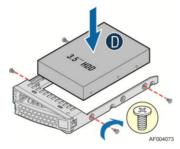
Installing Hard Disk Drive – Installing 3.5" HDD
